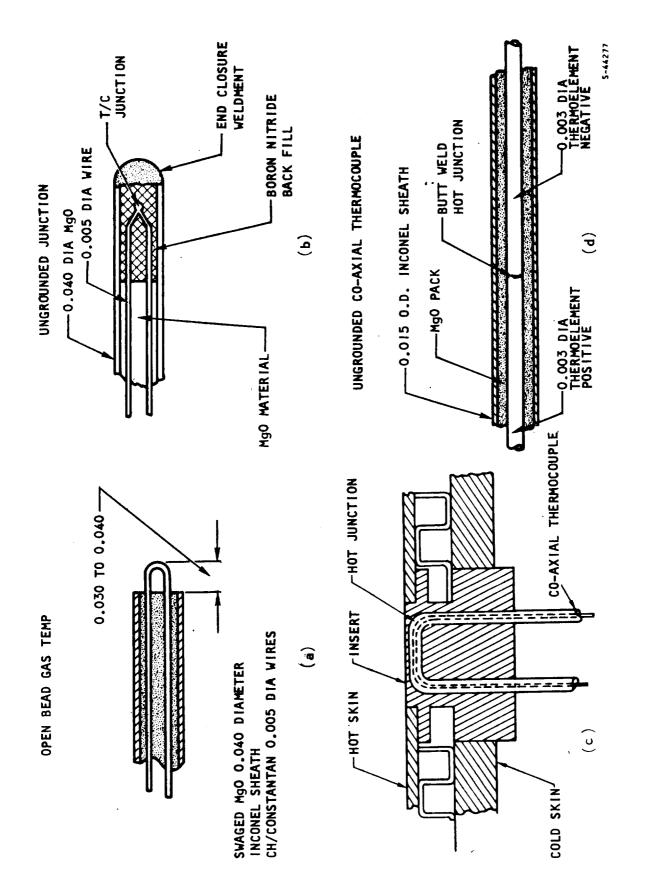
Thermocouple Configuration for Manifold Sensing
